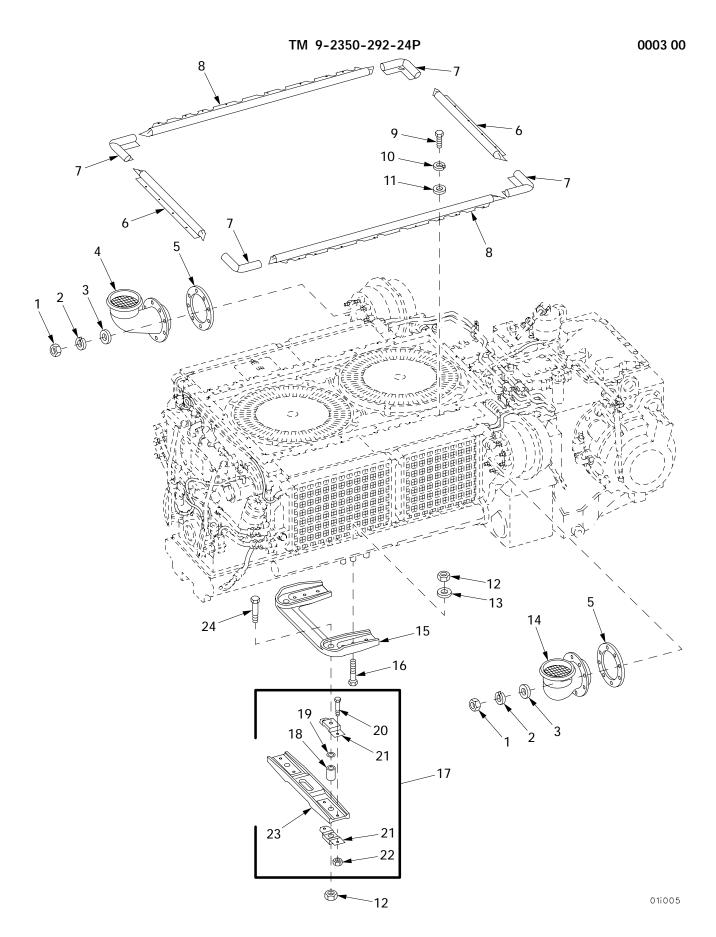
Engine Shroud Seals, Air In-take Elbow and Engine Mount Assembly
